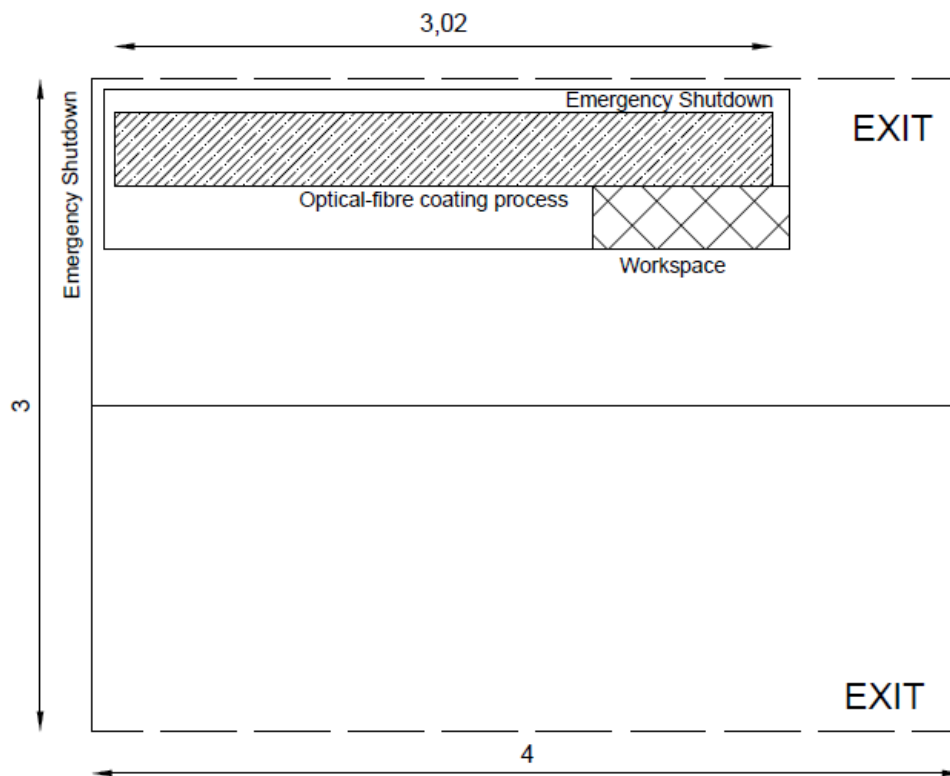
Floor plan layout of the walk-in fume hood containing the process
